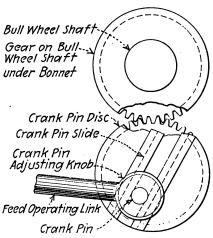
Shaper feed mechanism (operated by gears). The upper gear is fastened to the hub of the bull wheel and the lower gear is carried on a stud shaft in a bonnet. The crank pin disc is located in front of the lower gear. The gears are equal therefore each revolution of the bull wheel causes an oscillating movement of the feed operating link.
